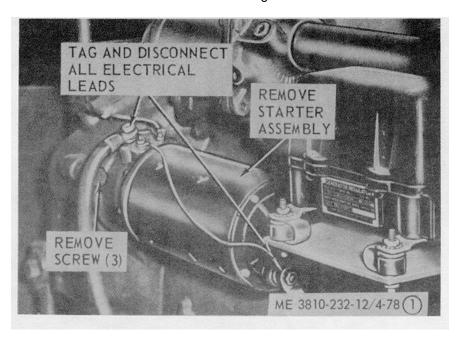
Crane engine starter and .solenoid, removal and installation. Sheet 1 of 3.
